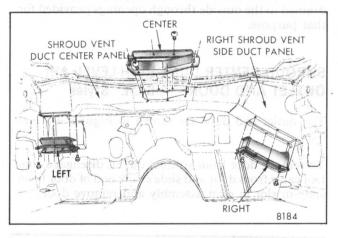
Air Duct Outlet Locations - "A-B-C-E" Styles
